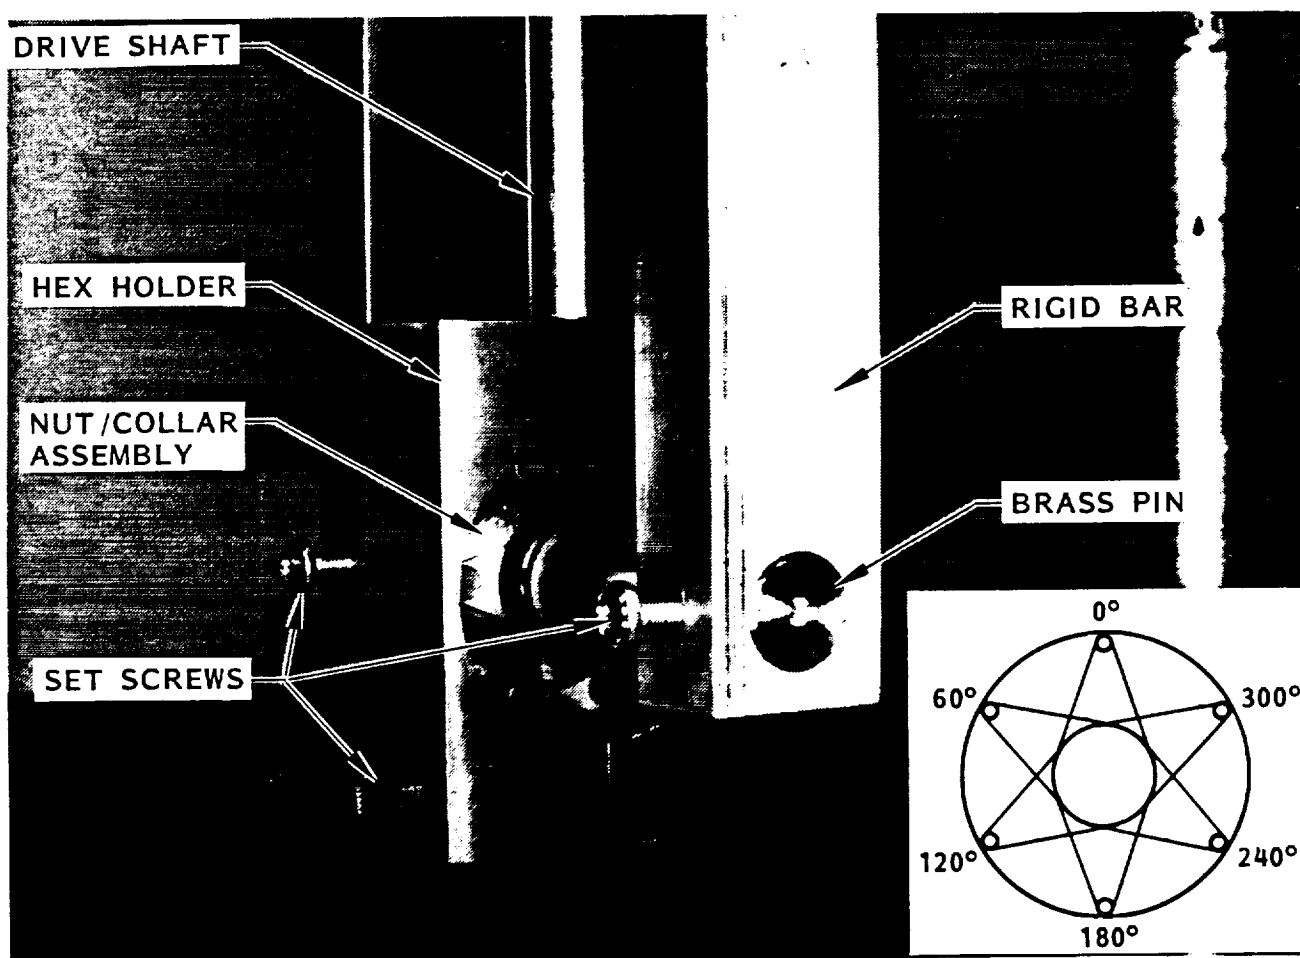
Nut/Collar Assembly in Hex Holder
